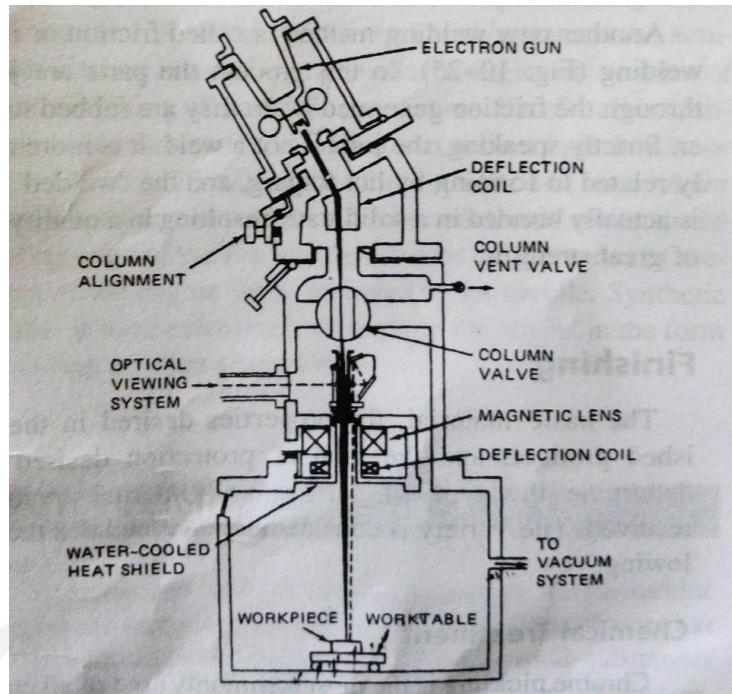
The Hamilton Standard electron-beam welder.
